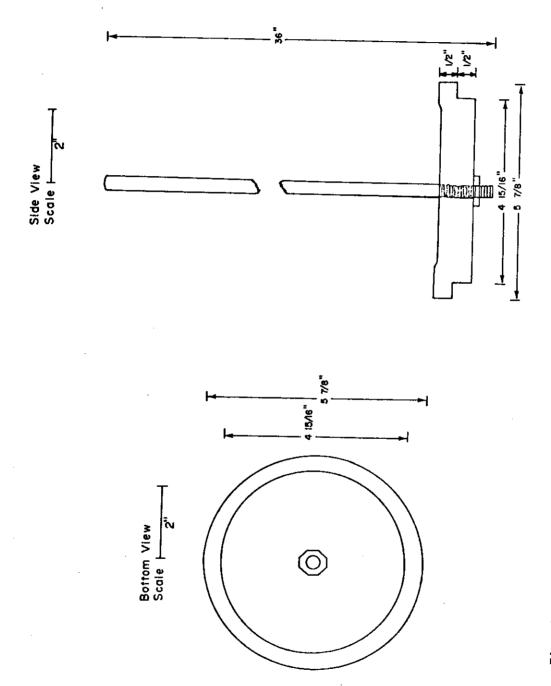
Guide plate for soil macroarthropod sampler, bottom view and side view.
